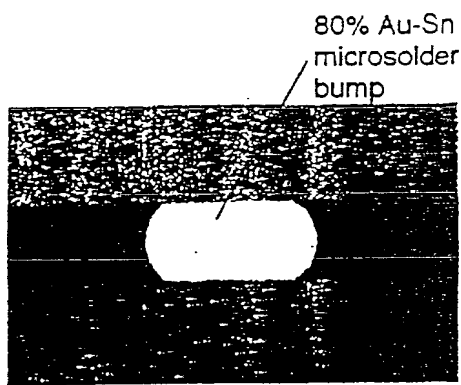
Cross sectional photograph of bonding test sample using 80% Au-Sn micro solder bumps.
